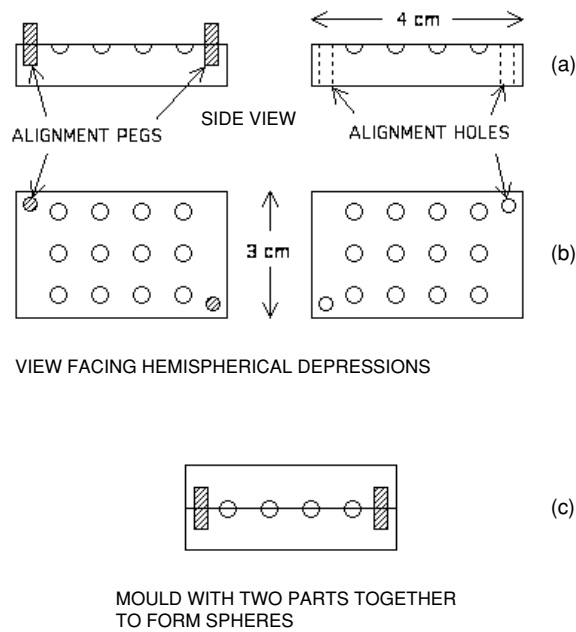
Diagrams of two-part moulds used to form twelve 4 mm diameter spherical inclusions: (a) side view; (b) view facing hemispherical depressions; (c) two parts of the mould pressed together to form 4 mm spheres.
